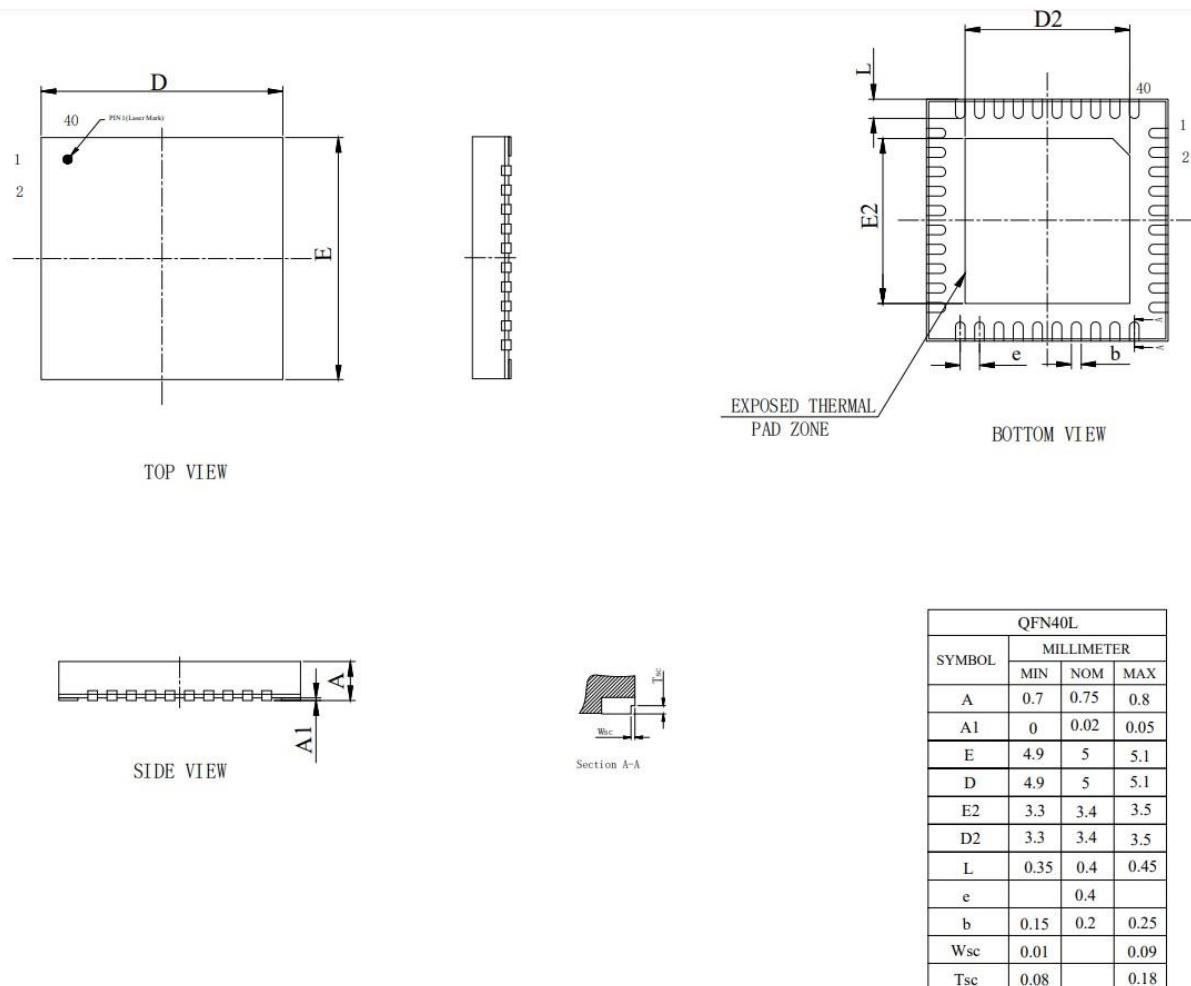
FU6881Q1 QFN40_5X5 Package Drawings and Dimensions
